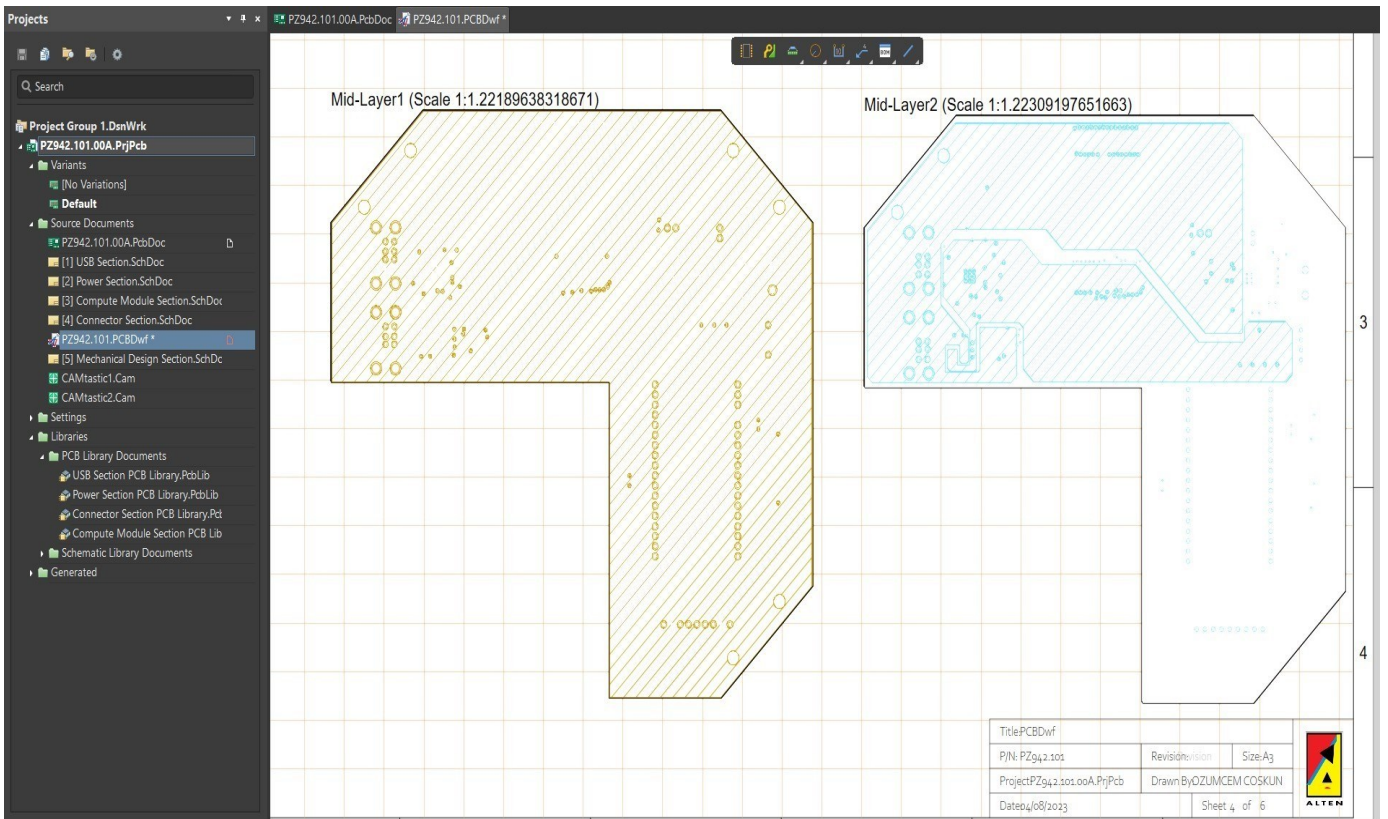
Mid-Layer 1 and Mid-Layer 2 Scales of PCB
